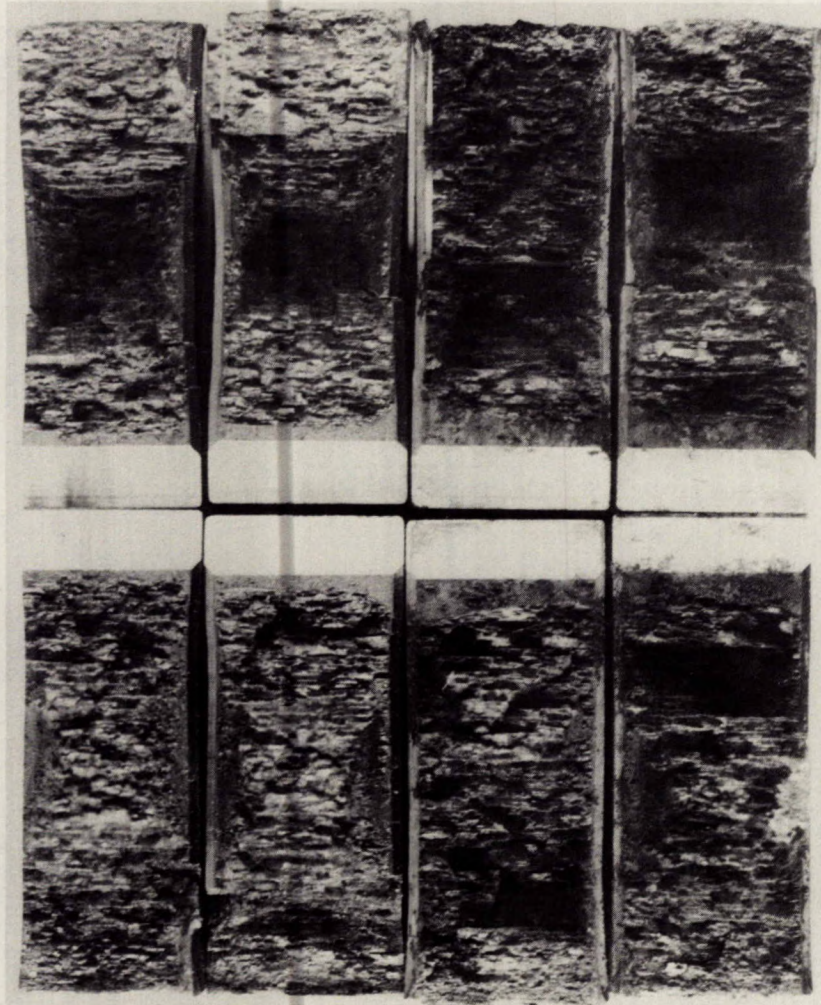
Fracture faces of T-1 parent metal specimens from 25 mm (1 in.) plate; from left to right, specimens 7, 8, 9 and 10. (Approx X3)
